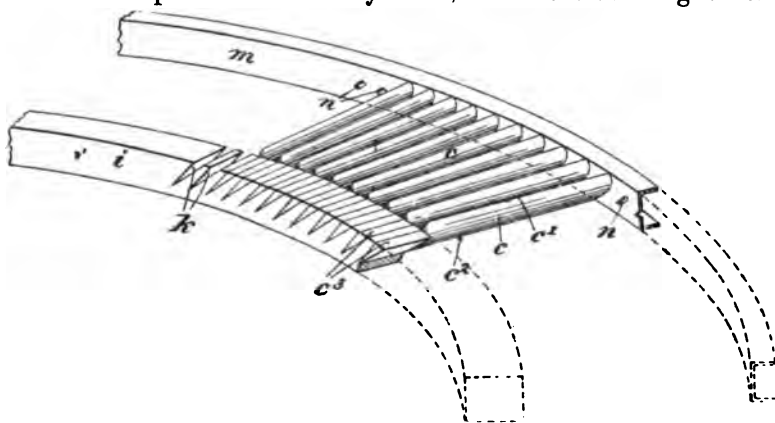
Perspective View of Ring of Blades in an Annular Groove in Rotary Spindle of a Turbine.
